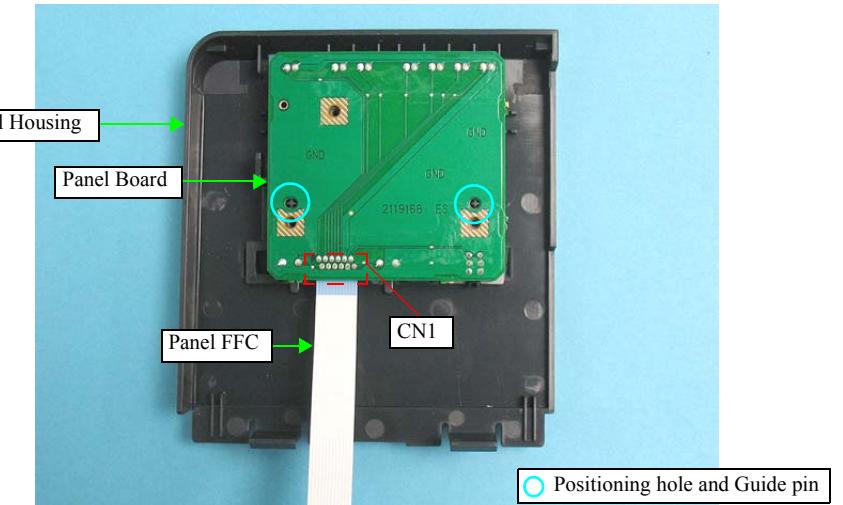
Removing the Panel Board. (B-300/B-308)
